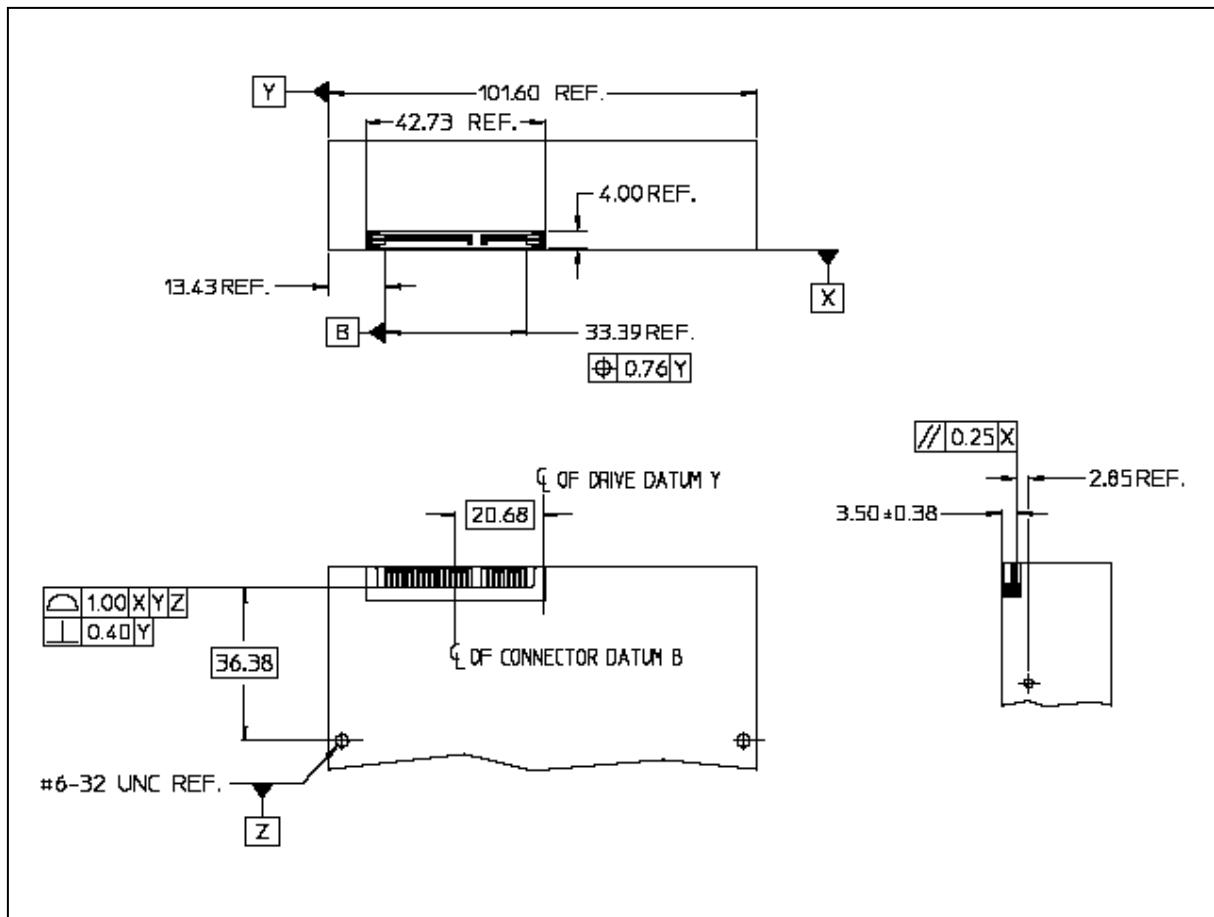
Device plug connector location on 3.5 inch bottom mounted device
